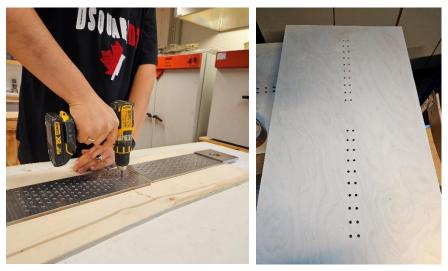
Illustrates the manufacturing process of the birch plywood test pieces.
